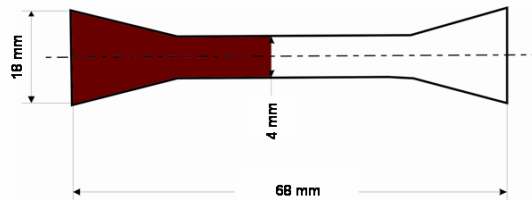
Tensile / HCF specimens used. Half of the specimens consist of laser build-up welded Ti6242 (highlighted in red).
